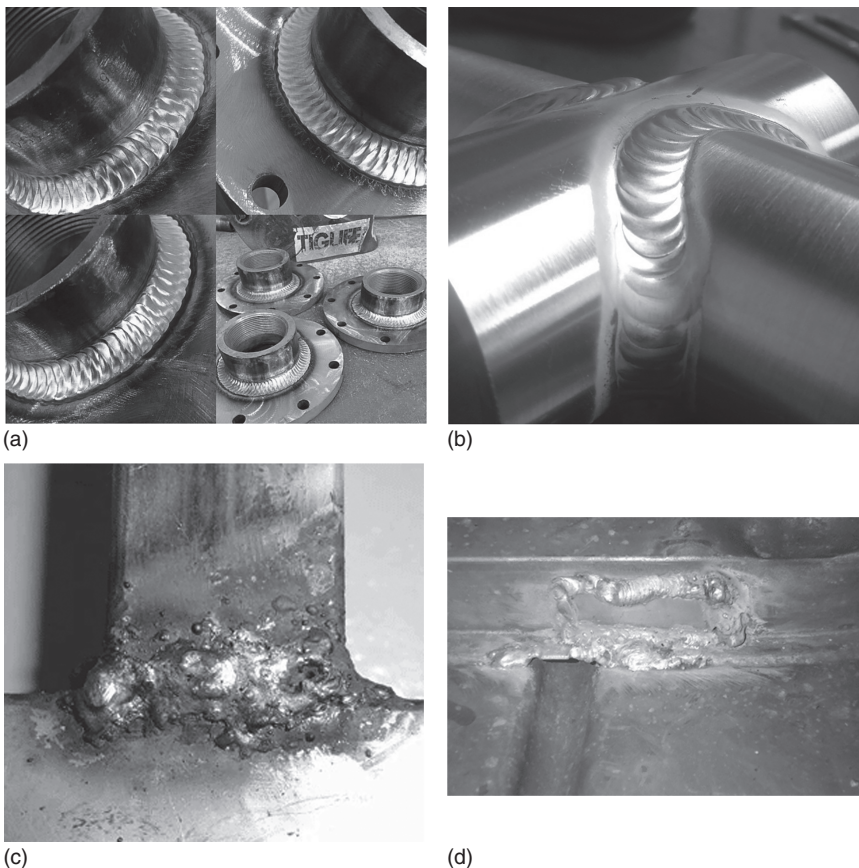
Two examples of superbly made fusion arc welds using manual gas tungsten arc (TIG) welding in (a) steel fittings and (b) Al alloy bicycle frames. In addition, two badly made welds: using a gas-metal arc to repair (c) a steel automobile part and (d) an Al alloy boat structure at a factory repair shop, with neither source being identified – fortunately for them – as images are in the public domain! Source: The former by Scott Raabe at his Clean Cut Metal Works, Houston, TX, USA and used with his kind permission; and the latter on the website www.cycling.zanconato.com by Mike Zanconato at Zanconato Custom Cycles, Sutton, MA, USA and used with his kind permission.
